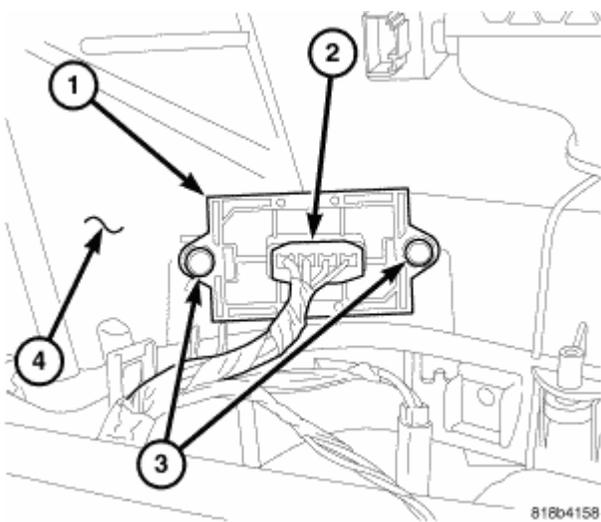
Blower Motor Resistor, Wire Harness Connector, Screws & HVAC Housing
